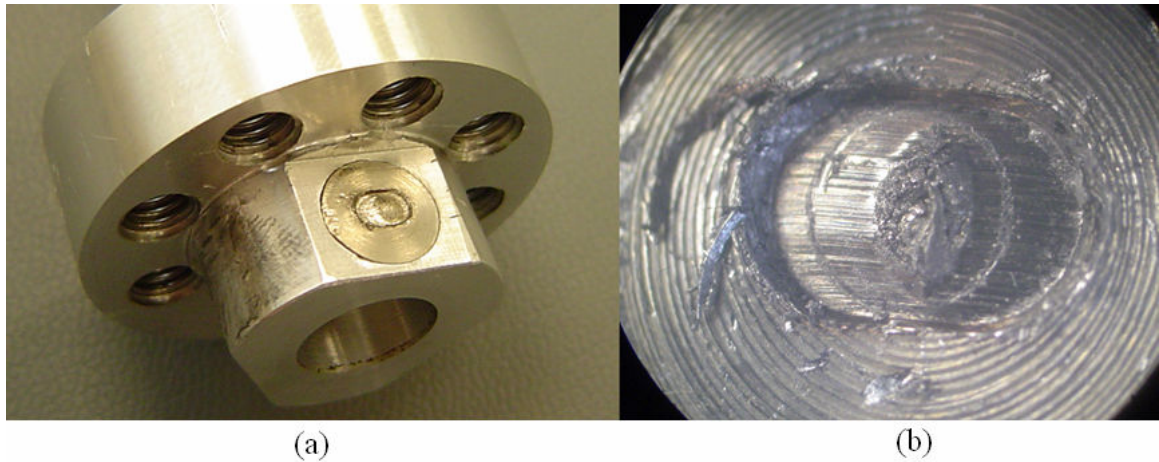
Picture of shaft flats (a) and close-up view of damage (b)
